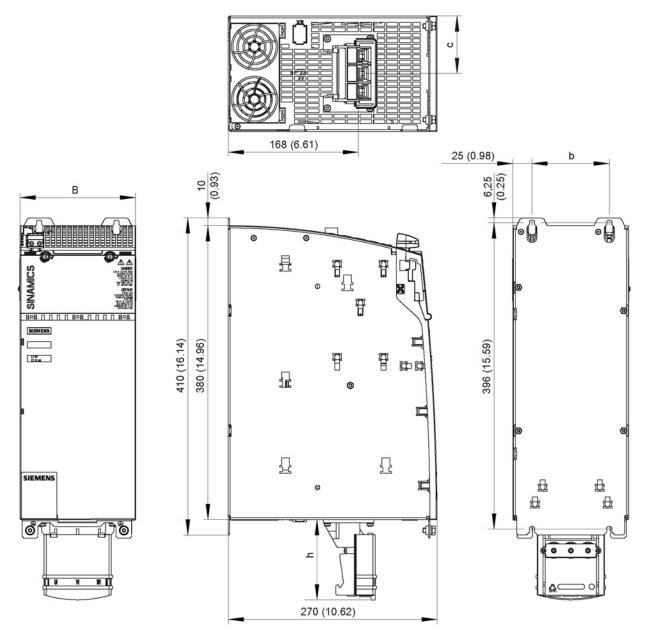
Dimension drawing of 36 kW and 55 kW Active Line Modules with internal air cooling (example, 36 kW), all dimensions in mm and (inches)
